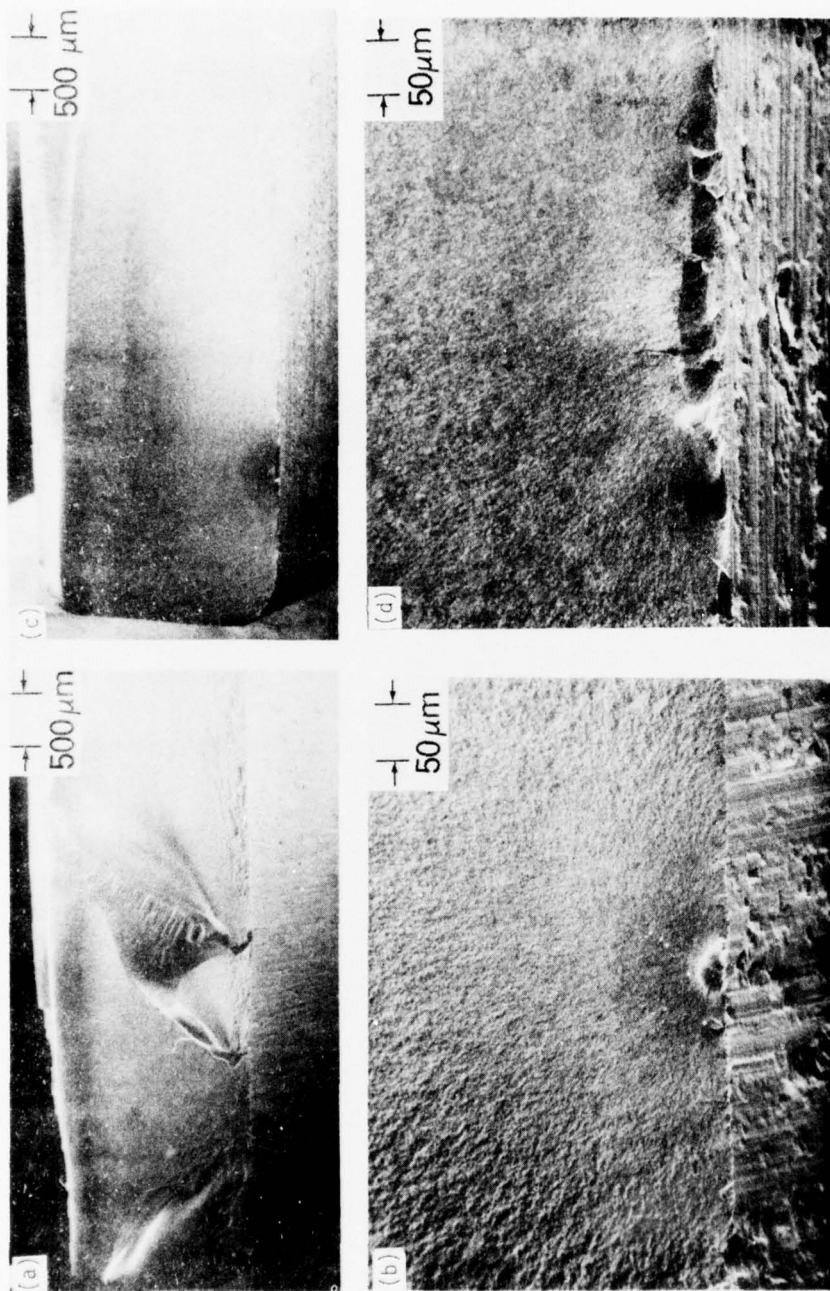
Failure of hot pressed  $\text{MgF}_2$  infrared optical material from machining flaws illustrating the effect of grinding direction on flaw character. (a) and (b) show the fracture initiating area of a specimen ground parallel with the tensile axis so that the flaws activated are those formed perpendicular to the direction of abrasive particle motion. Note the approximate semi-circular nature of the flaw. (c) and (d) show a specimen of the same material machined at the same time with the machining direction perpendicular to the tensile axis of the specimen. Note the substantially elongated character of the flaw causing failure in (d). Note that the strengths of these two samples, that of (a) and (b) 12,000 psi and of (c) and (d) 6,000 psi are representative of the strength anisotropy resulting from the dual population of directional grinding flaws.
